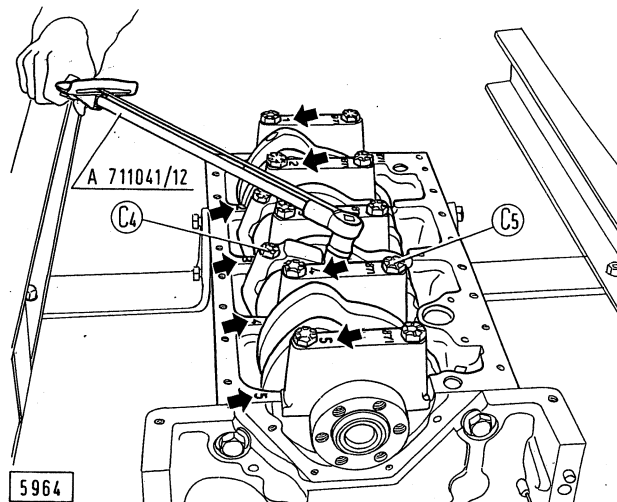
Tightening the connecting rod bearing cap self-locking screws (C₄) with the torque wrench A 711041/12.
